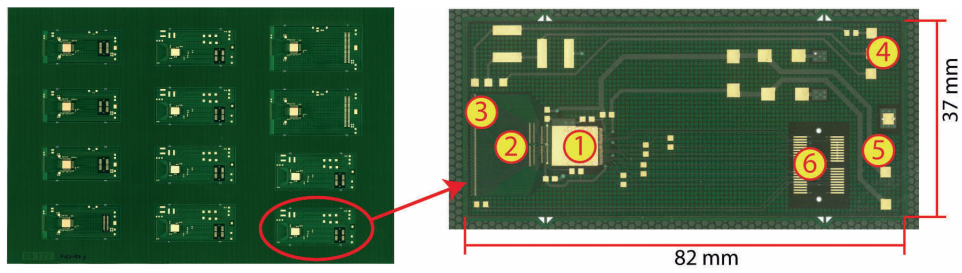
Left:* photograph of a sheet containing the various designs of flex chip carrier boards. *Right:* photograph of a chip carrier board. The type in the picture hosts one APV chip and connects it to one sensor with a 150 μm bond pitch. (1) pad for one APV readout chip; (2) fanout structure; (3) bonding pads for the sensor; (4) sensor biasing connectors; (5) APV power supply connectors; (6) fine pitch data cable connector.
